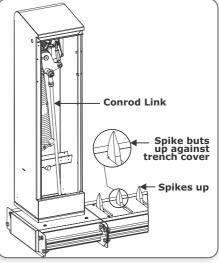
ADJUSTING THE SPIKES - DIRECT DRIVE
